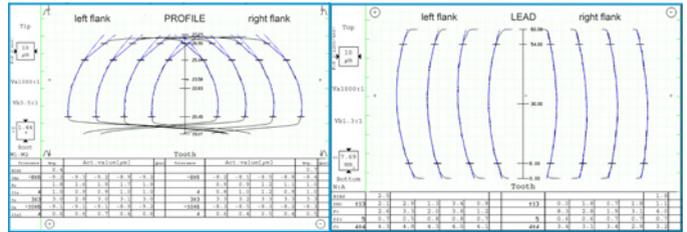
Profile and lead measuring chart of ring gear, module 2.4.
